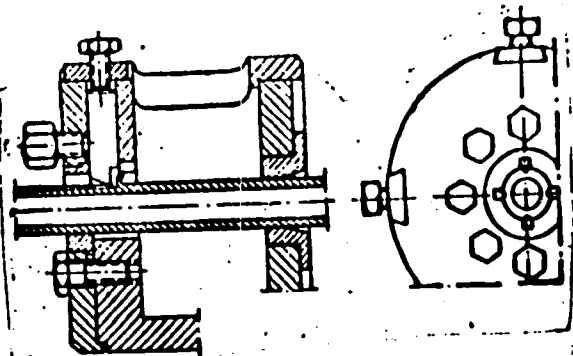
Yoke for drawing longitudinal channels on the outer surface of pipes.
